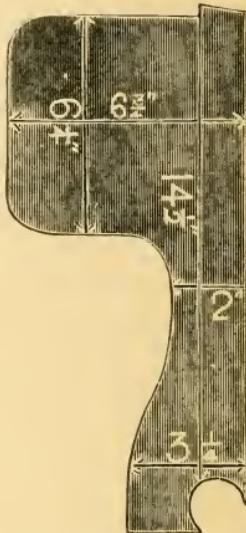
Combined Winker and Brace-piece, shewing Cheek-line.
